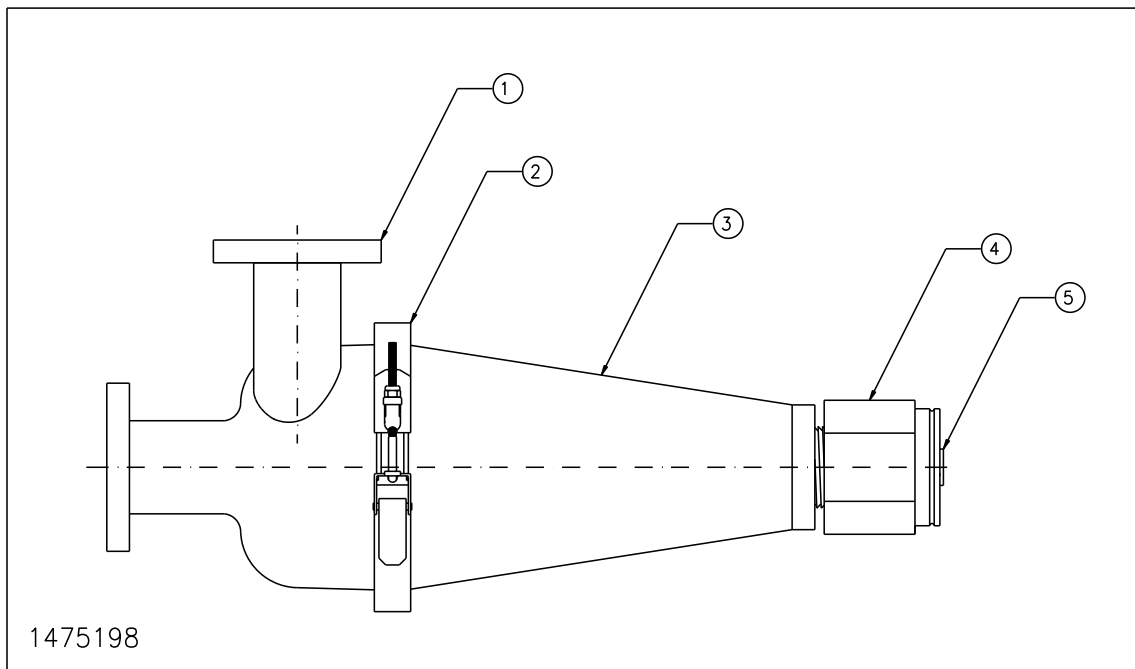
4" CTX CONE ASSEMBLY
